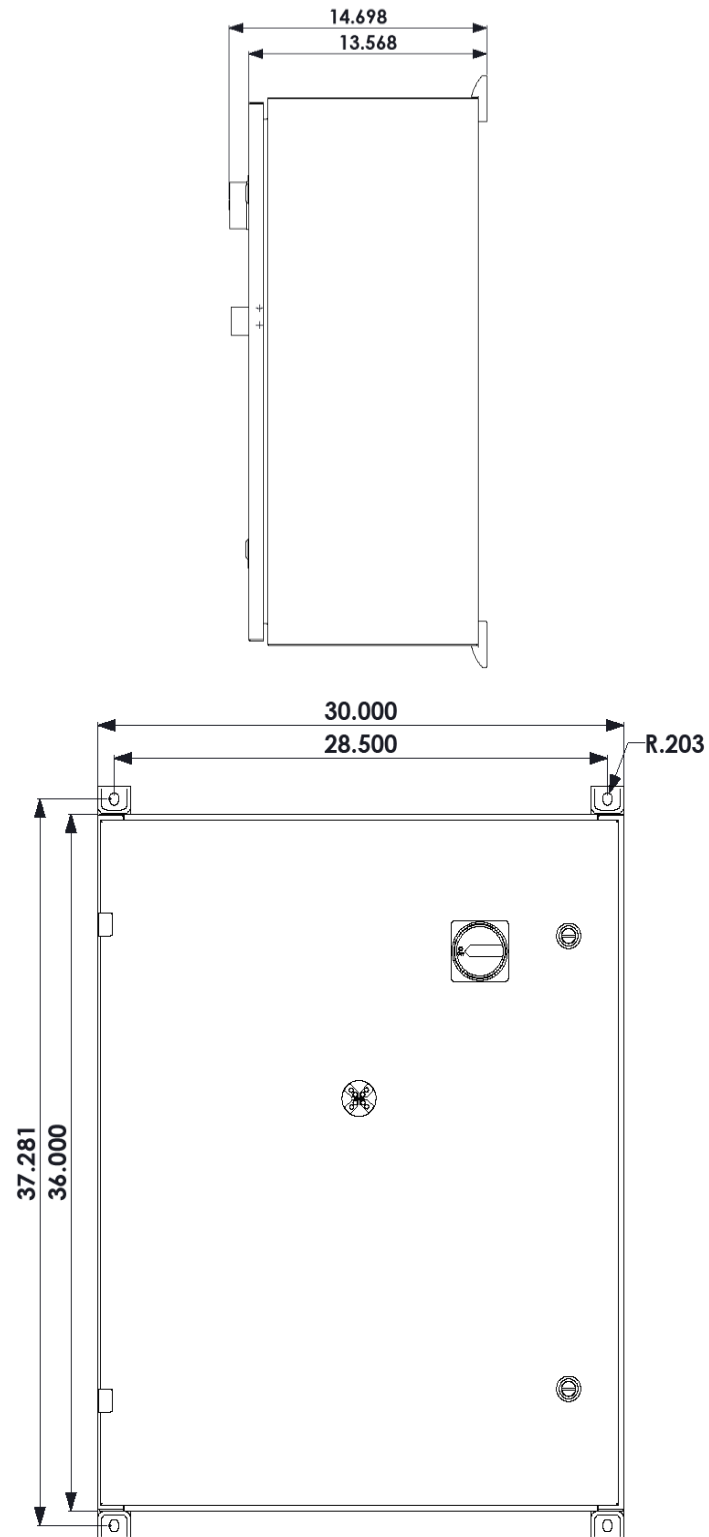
S3534EC E61 Enclosure Dimensional Outline
